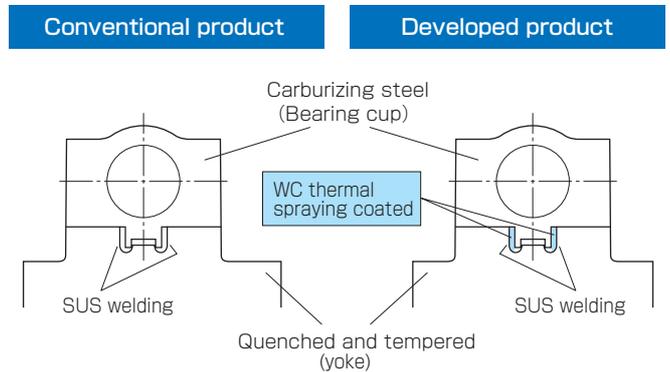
Structure of Key and Details of WC Thermal Sprayed Part
